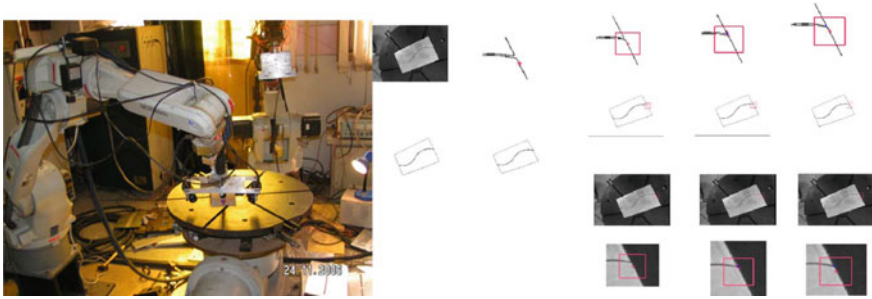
The autonomous detection and guiding of start welding position for arc welding robot
